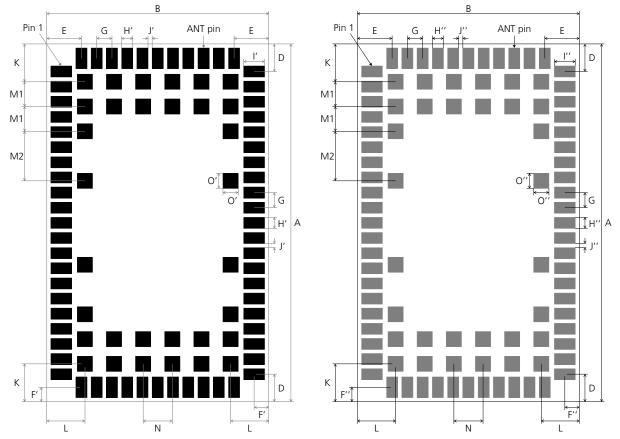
TOBY-L1 series modules suggested footprint and paste mask (application board top view)
